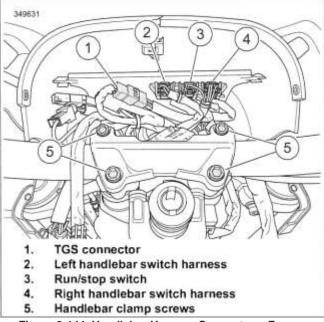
Handlebar Harness Connectors: Frame-Mounted Fairing Models
